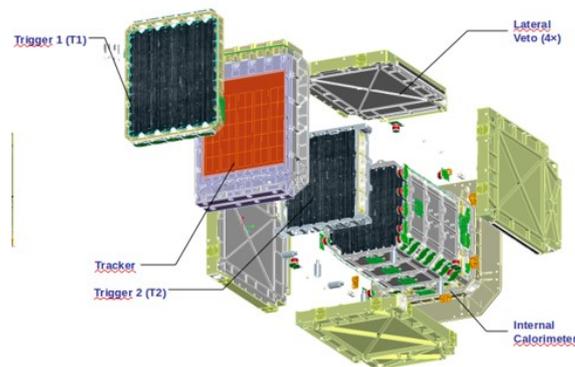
Exploded view of the HEPD-02 apparatus. The assembled dimensions are approximately $20 \times 20 \times 40 \text{ cm}^3$. The tracker follows the first trigger scintillator layer (T1).
